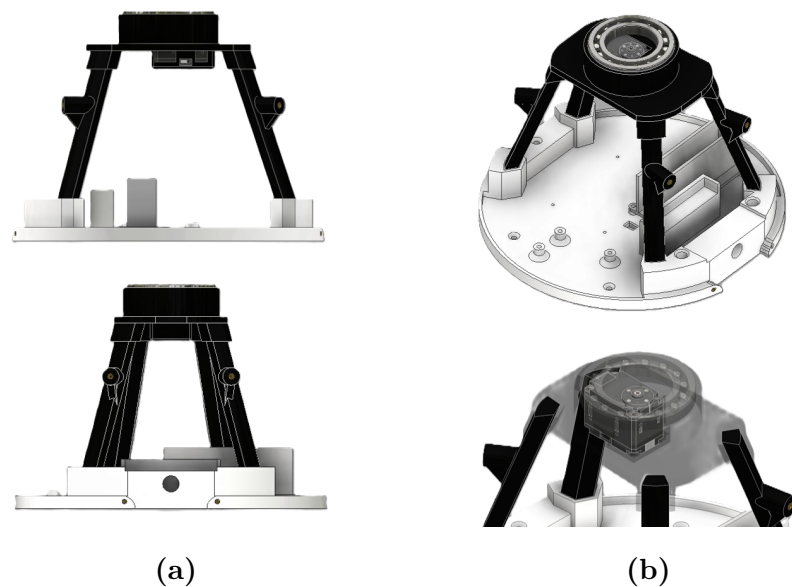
Details of the support structure: (a) Front and right views, (b) Motor detail.
